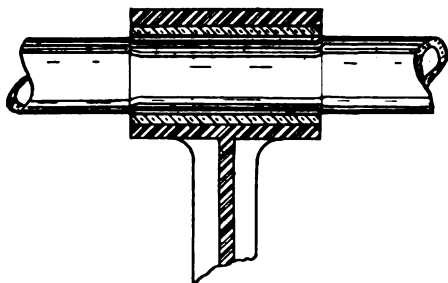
THE EFFECT OF FITTING A NEW BUSHING TO A WORN WRIST PIN. IT APPEARS TIGHT BECAUSE IT BEARS ON THE EDGE
